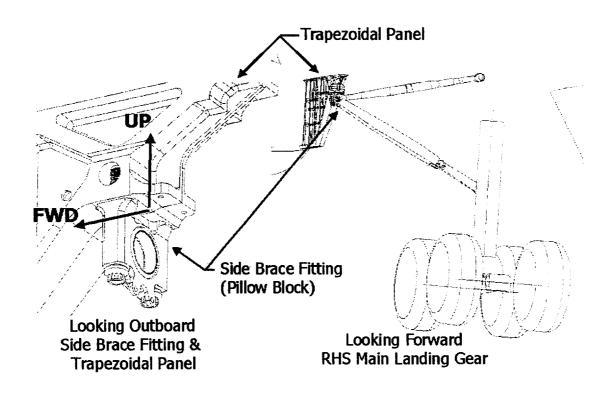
Side Brace Fitting and Trapezoidal Panel
